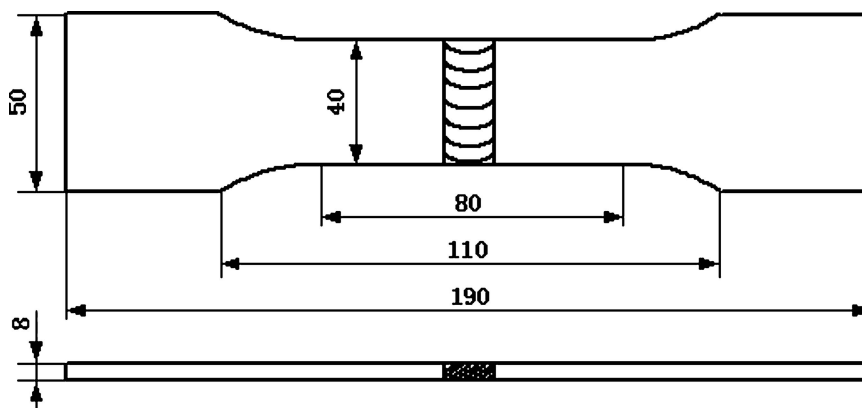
Shape and size of the fatigue test specimens (Unit: mm).
